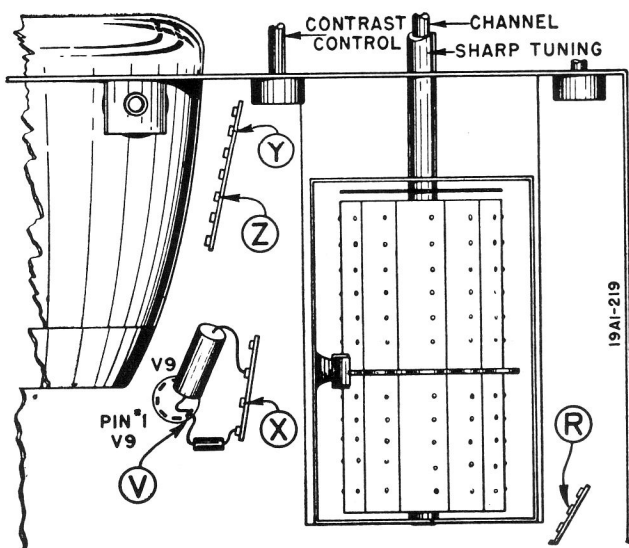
Bottom View Chassis showing Alignment Connection Points.
